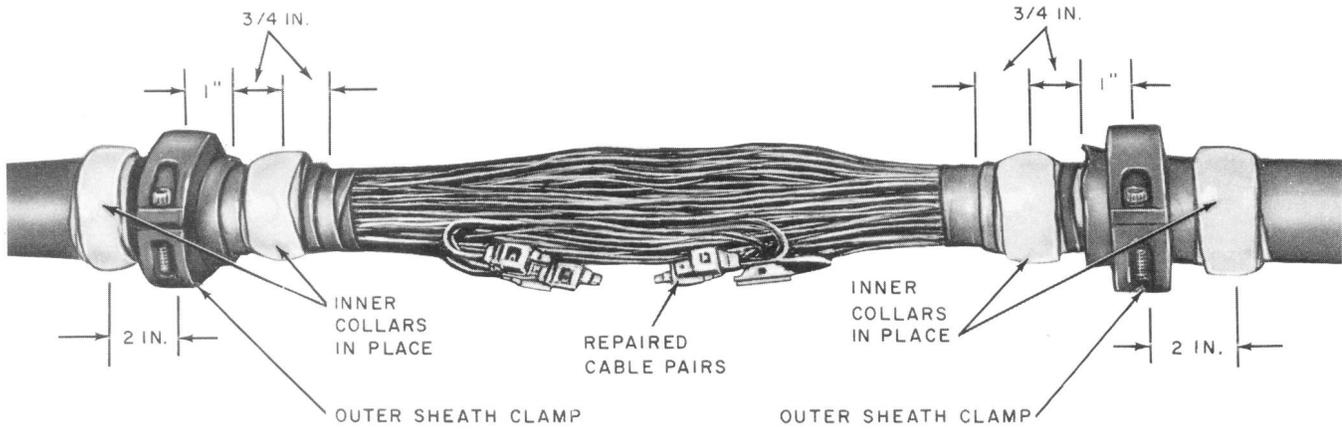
Sheath Clamps and Collars Placed—Dual Sheath Cable
